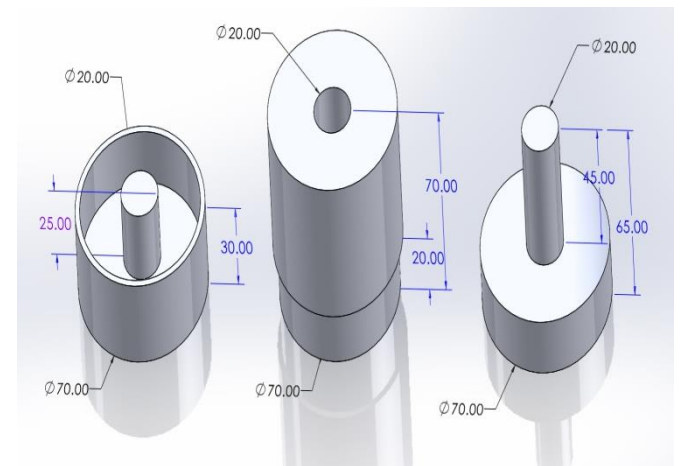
3d Drawing of Die, Base and Punch with Dimensions
